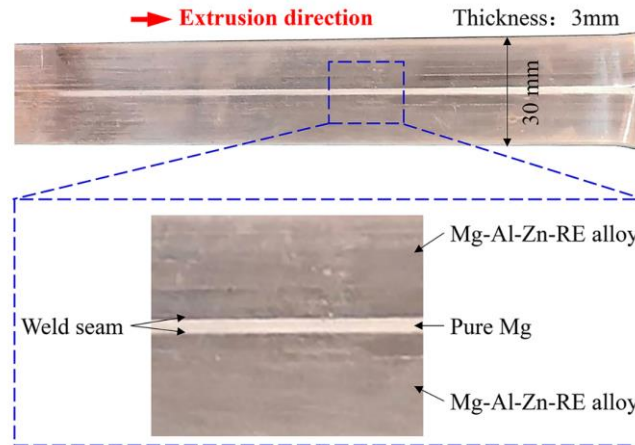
Extrusion-welded plate composed of pure magnesium in the middle and the Mg-Al-Zn-RE alloy on both sides.
